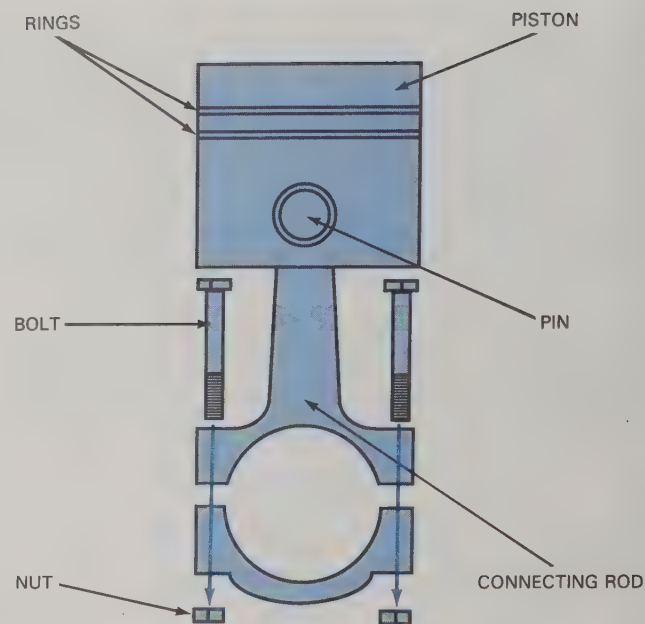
Components of a typical compressor piston assembly. Rings are not used on most smaller-capacity compressors.
